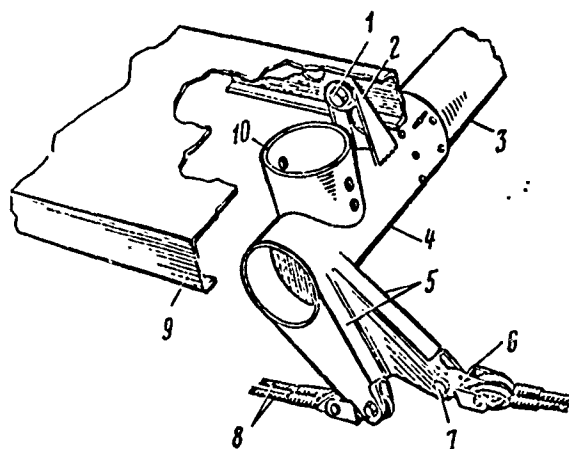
Cross tube with joints and its mounting to the load-bearing beam: 1 - bolt; 2 - bracket; 3 - duralumin cross tube; 4 - steel joint; 5 - elevator control levers; 6 - link; 7 - bolt; 8 - cables; 9 - left load-bearing beam of the cockpit floor; 10 - vertical load-bearing sleeve with two openings for the attachment of control columns.
